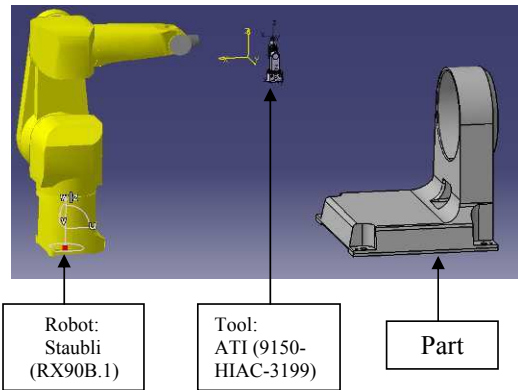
Illustration of robot, tool and part in a DELMIA environment
